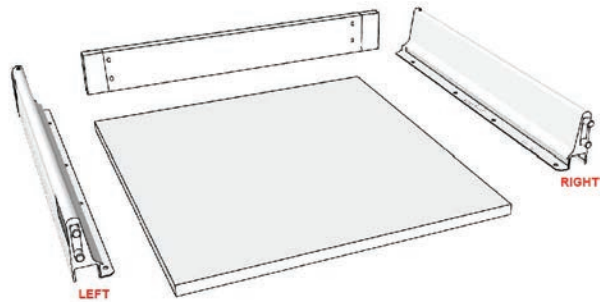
Using the screws (4 per side) provided assembled the left and the right side to the base plate.
